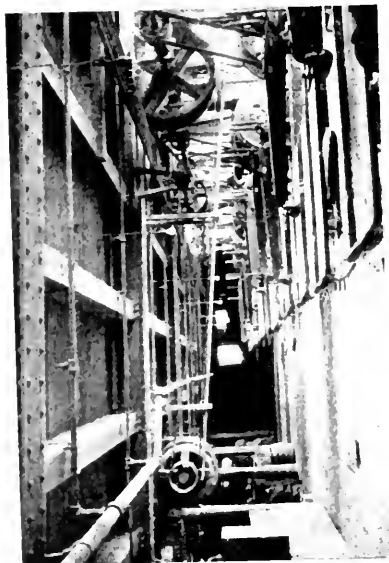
50-h.p. Induction Motor Driving 31 Staking or Softening Machines
